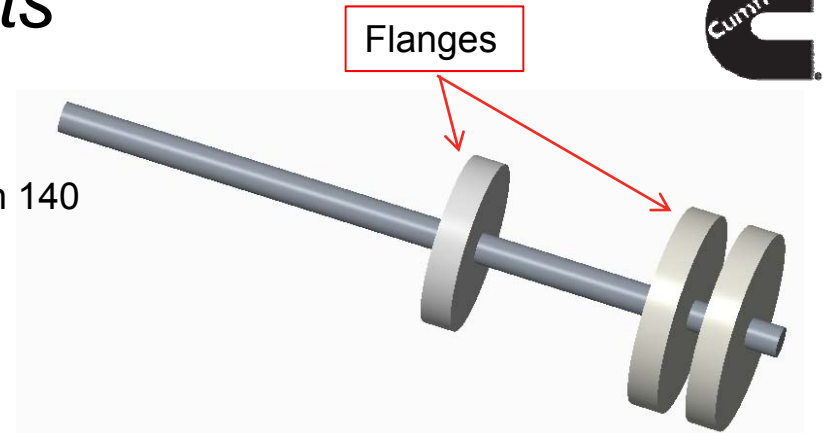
CAD rendering of the custom test shaft employed in the test rig.
